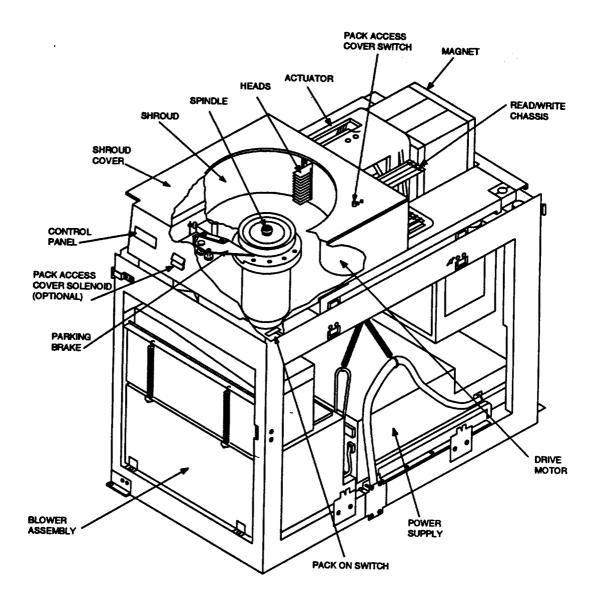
KS-22072, L1 Disk Drive, Exploded View
